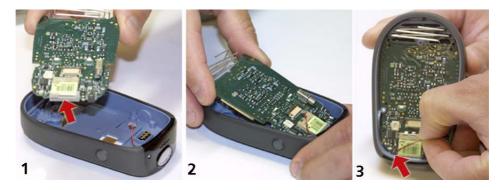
Inserting the printed circuit board. Mind the rubber sealing of the loudspeaker and that the cable runs in the cut.
